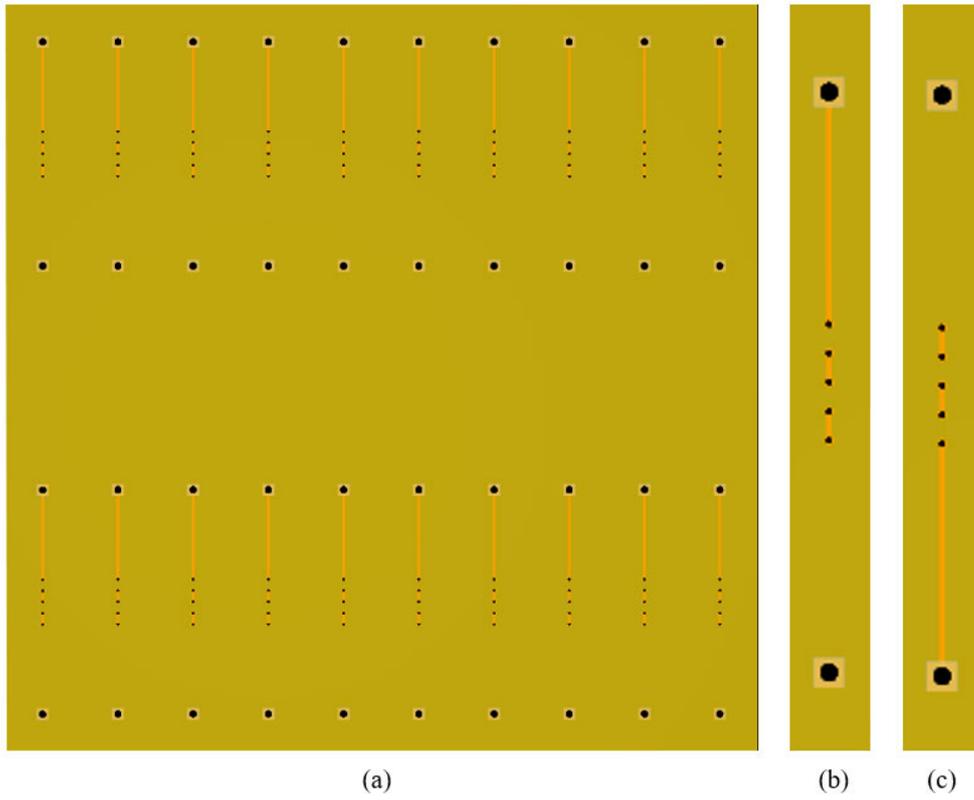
PCB Design for experimentation with five vias on a circuit, (a) the PCB with two rows of ten testing circuits, (b) the top layer view of a single circuit and (c) the bottom layer view of a single circuit.
